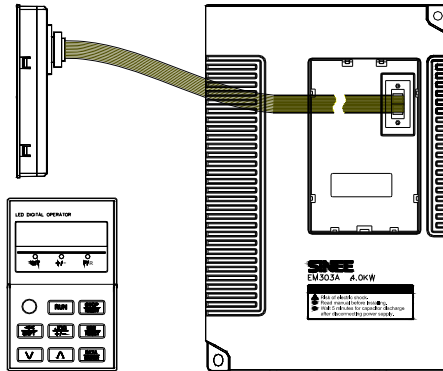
Disassemble the Keypad and Connect Extension Keypad Wire
